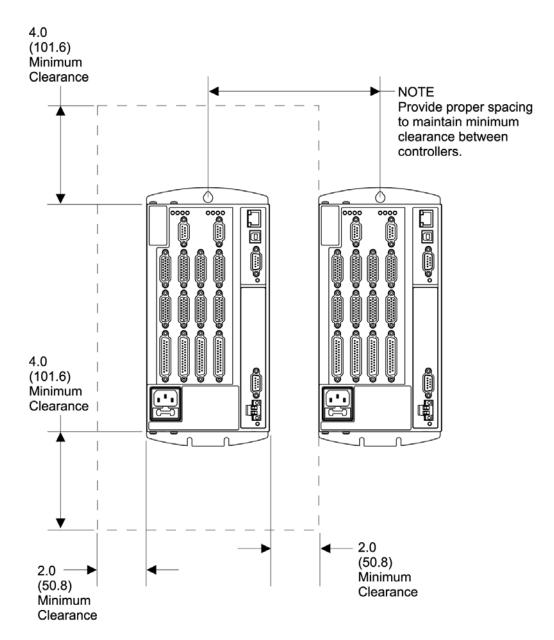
Mounting Clearance for ACR9000 and ACR9030 6/8 Axis Configuration
